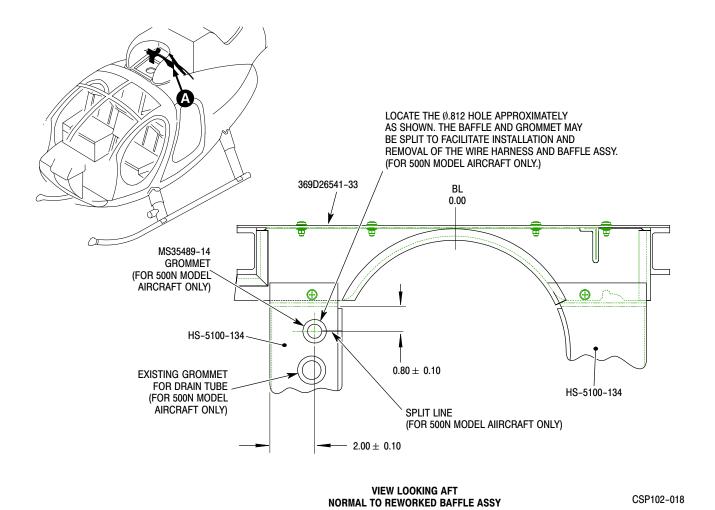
HS-5100-134 Baffle Assembly Modification
